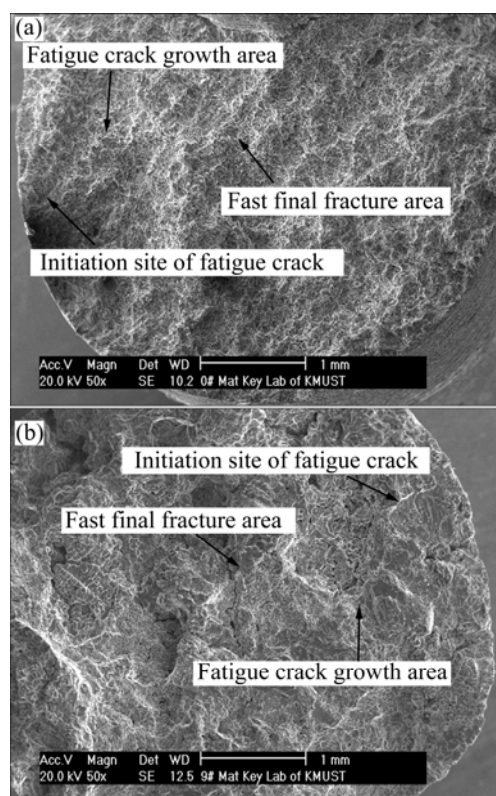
Fatigue fracture surfaces: (a) specimens 0; (b) specimens 9
